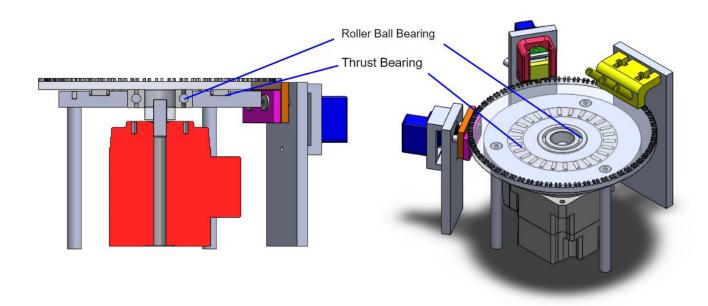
Front section (left) and isometric view (right) of design additions to the rotary stage.
